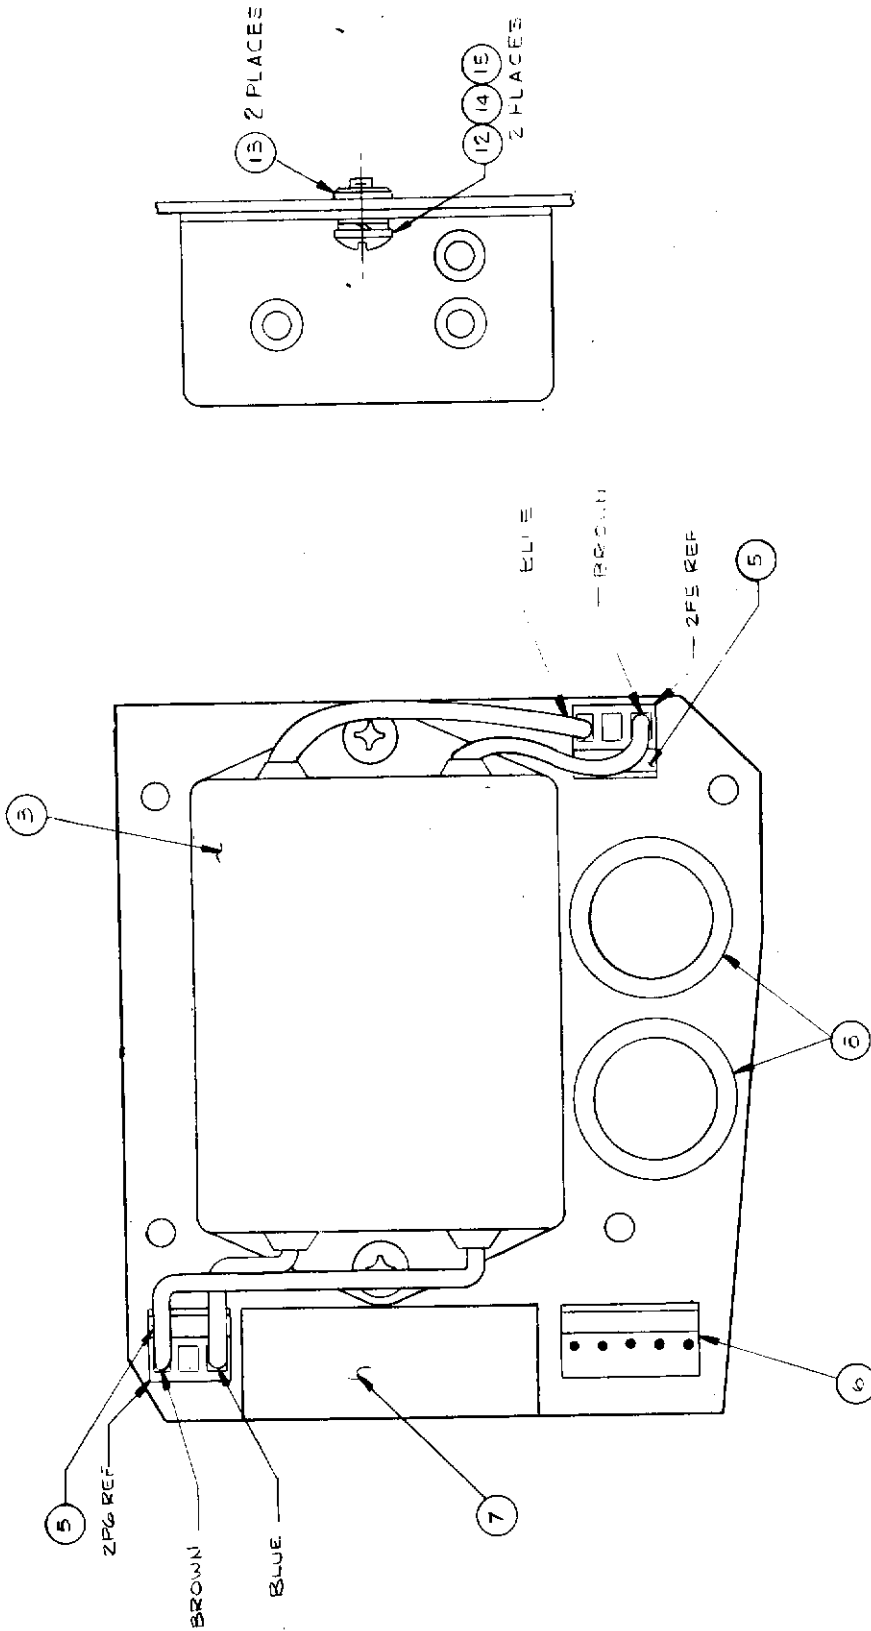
PARTS LOCATION DIAGRAM, PCB ASSEMBLY LINE/CHOKER FILTER
